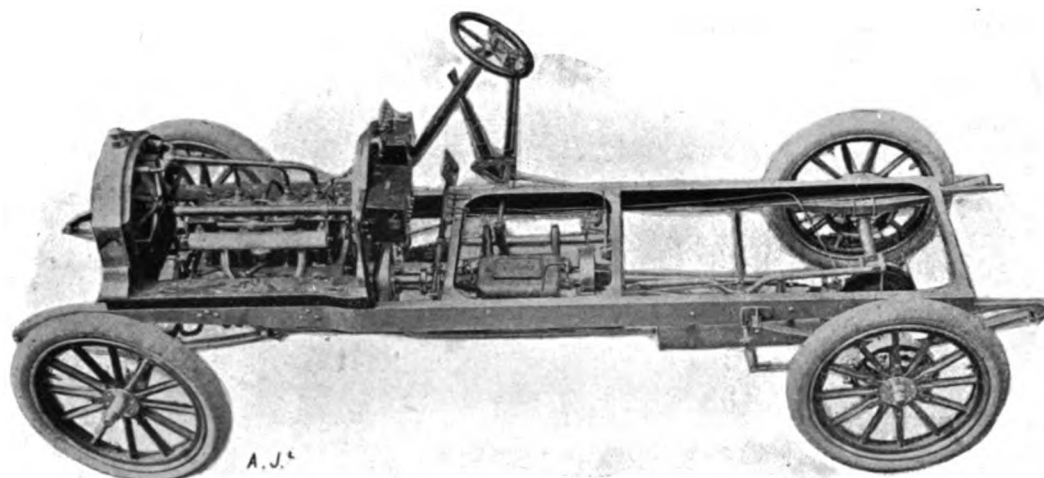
View from above of the 16-20-h.p. Cupelle Car, showing the special pressed-steel frame with its welded transverse members.
